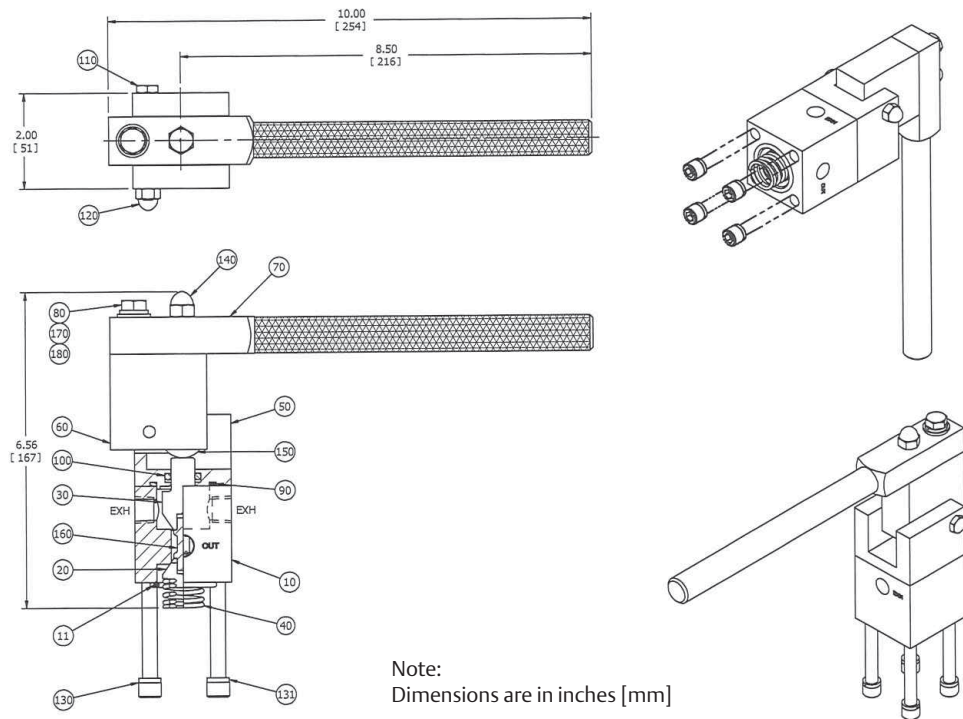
Typical manifold assembly and handpump for gas/hydraulic operator
